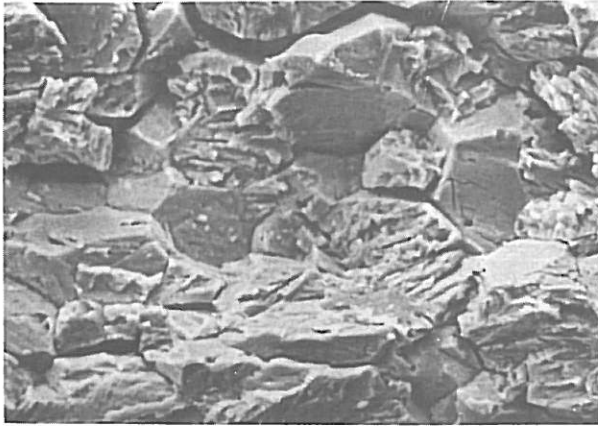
S.E.M. fractograph of a 304 austenitic stainless steel specimen strained in solution at a crosshead speed of 9.8 nm/s. Fractograph show faceted intergranular fracture and some transgranular cleavage fracture.
